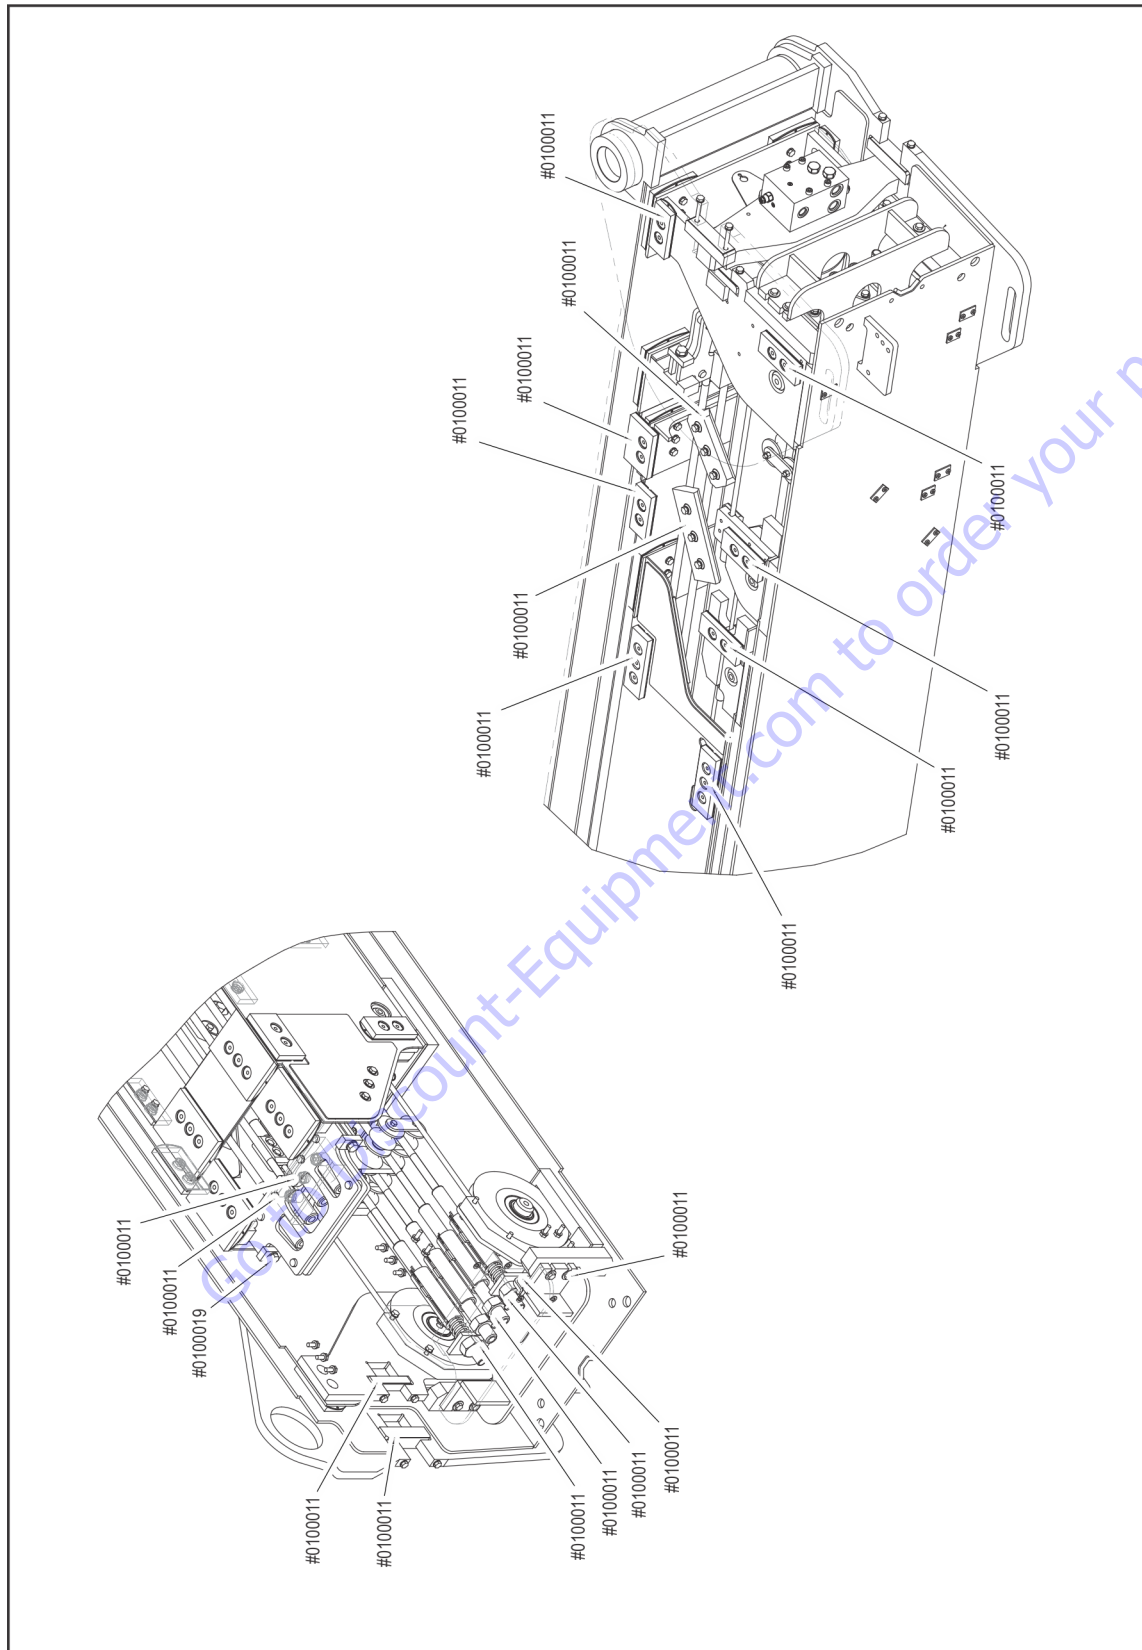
Locations for Threadlocker Application - Sheet 2 of 5
